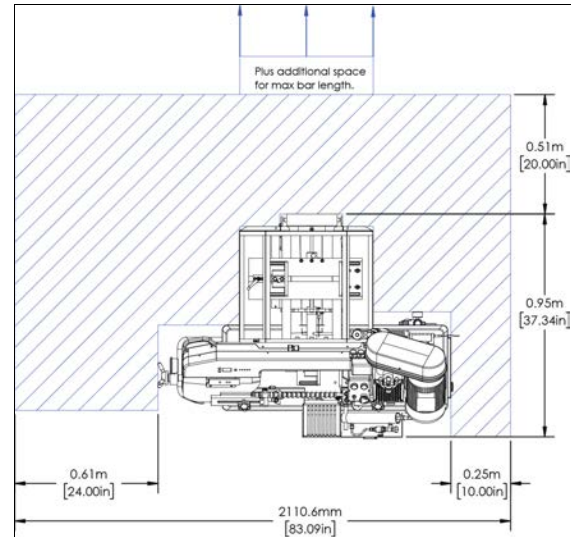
Dimensions of the machine and its required added space, as viewed from above.
